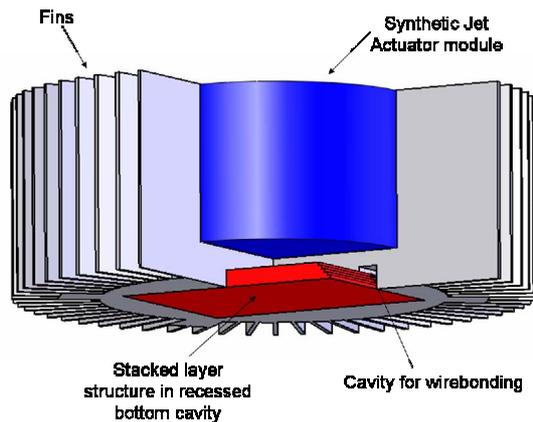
View of design concept with bottom front corner cut away to show the position of the stacked layer in the heat sink base and wire bond cavity
